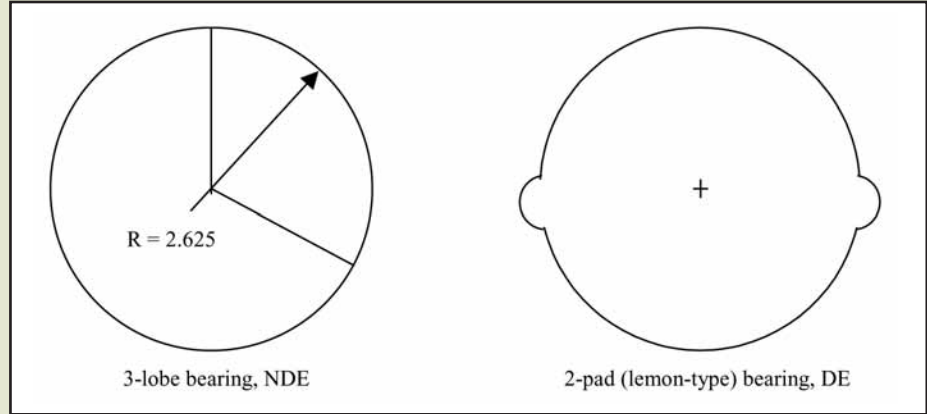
Geometry of original sleeve bearings of compressor rotor. Note that the NDE bearing has no axial grooves.
